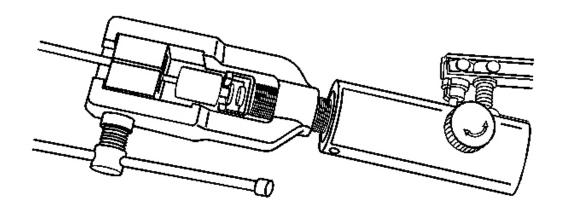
Rotating J 45405 To Bottom Against Die Cage Courtesy of GENERAL MOTORS CORP.
